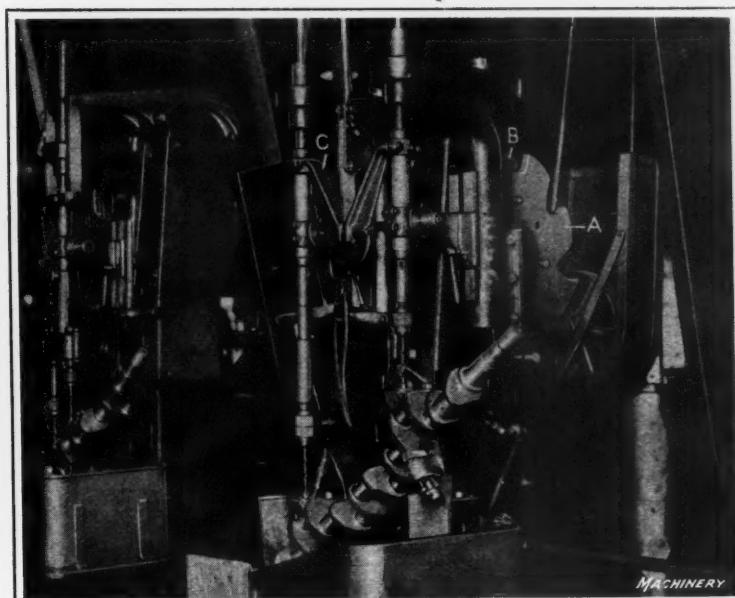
Special Machines for drilling Crankshaft Oil-holes
